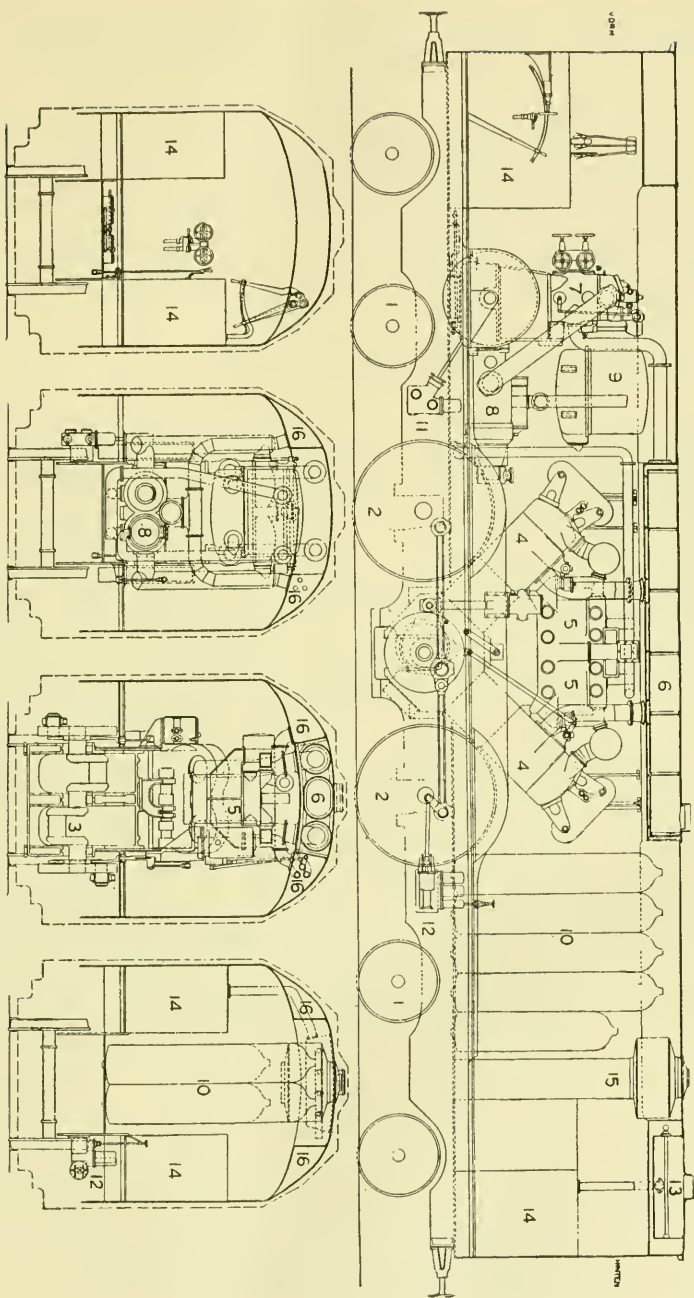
SECTIONAL VIEW OF DIESEL LOCOMOTIVE SHOWING CAR CONSTRUCTION
